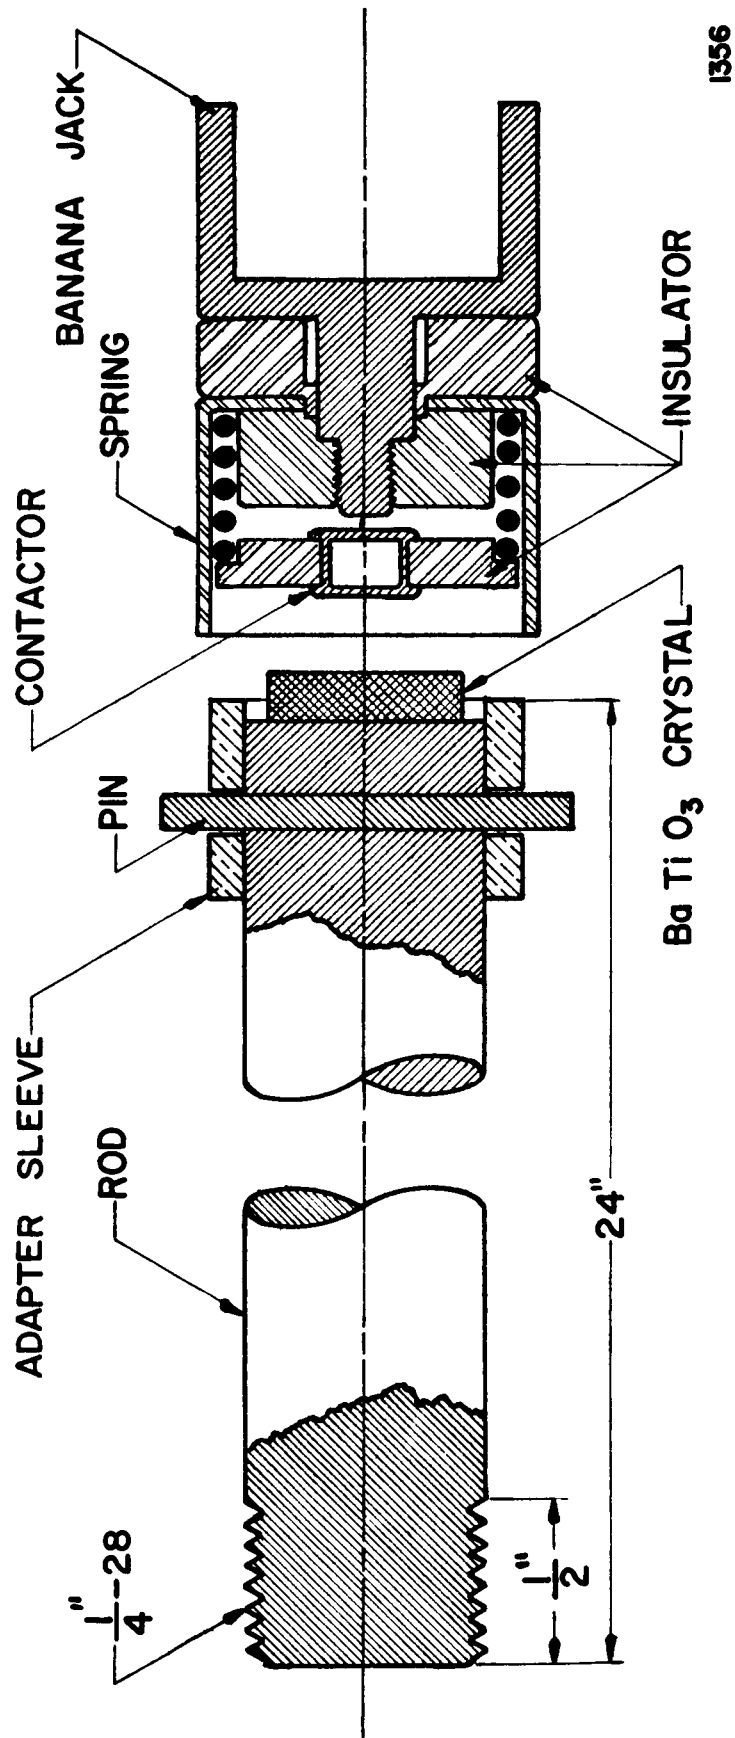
Schematic drawing of plexiglas electrode specimen-holder assembly for contact measurements.
